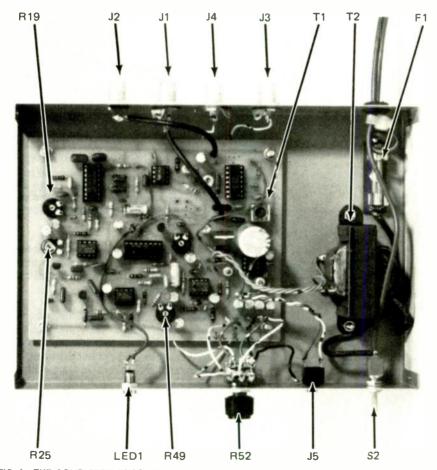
THE COMPLETED DECODER appears as shown here. The board shown was an early prototype, so it doesn't match the parts-placement diagrams (shown in Fig. 7 and Fig. 8) exactly.
